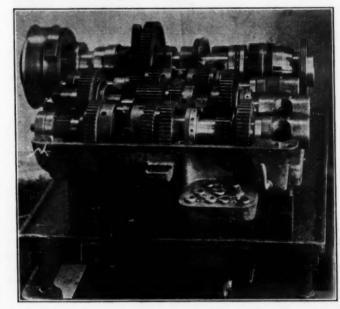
Headstock of 3-in. Flat Turret Lathe
